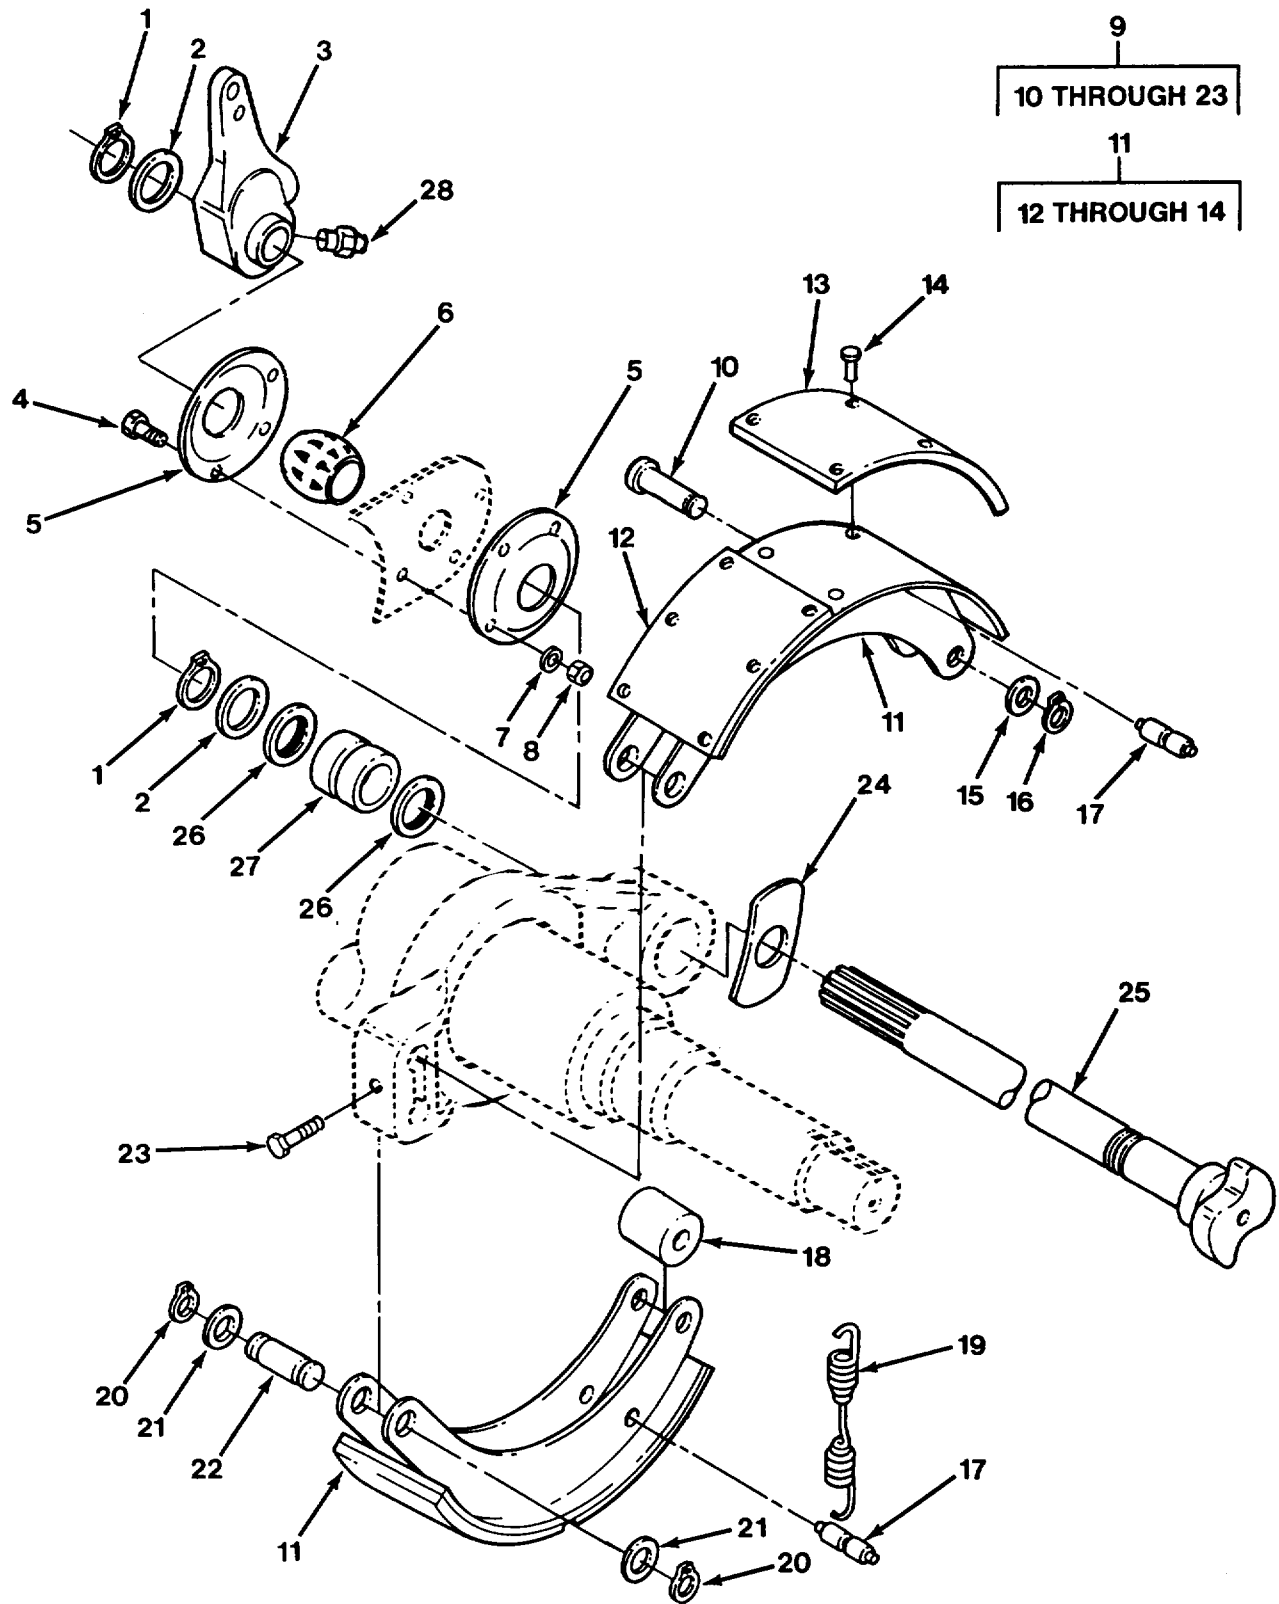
BRAKE AND BRAKE SHOE ASSEMBLY
